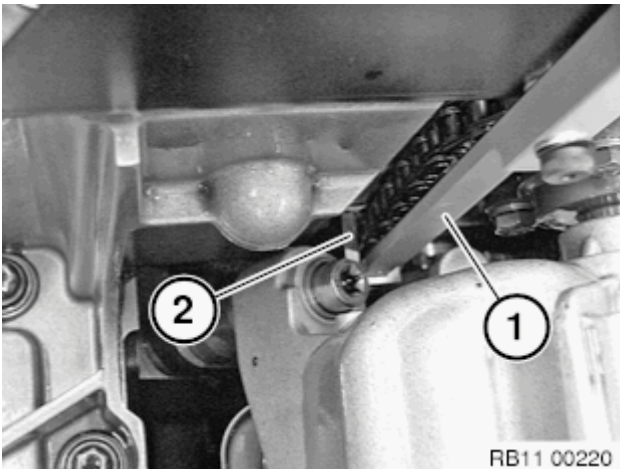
Positioning Drag Pointer Of Special Tool (2 213 485)
